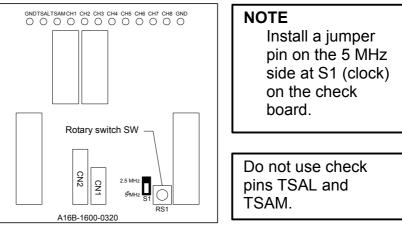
Fig. I (c) Connector layout on servo check board C (A06B-6057-H602)
